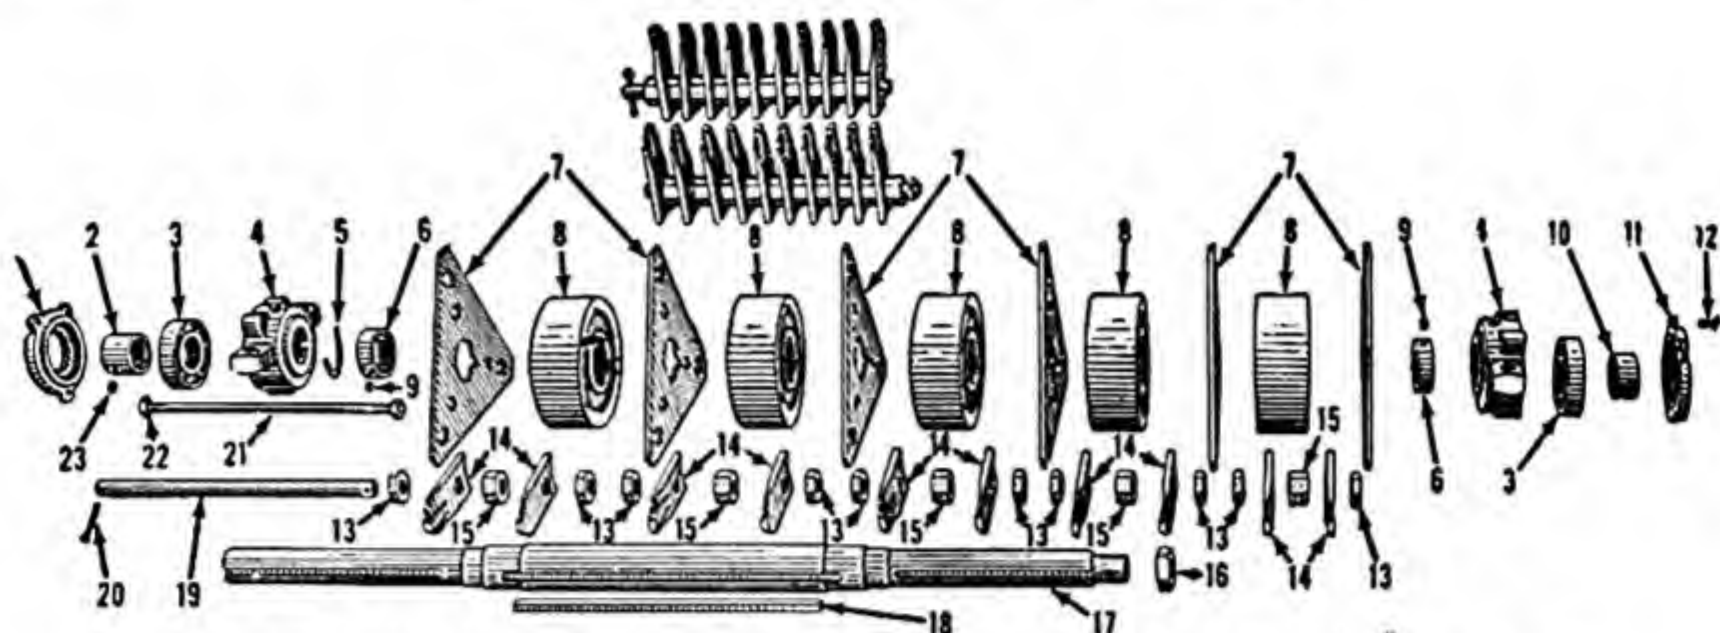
Exploded view of hammer-mill rotor showing component parts.
